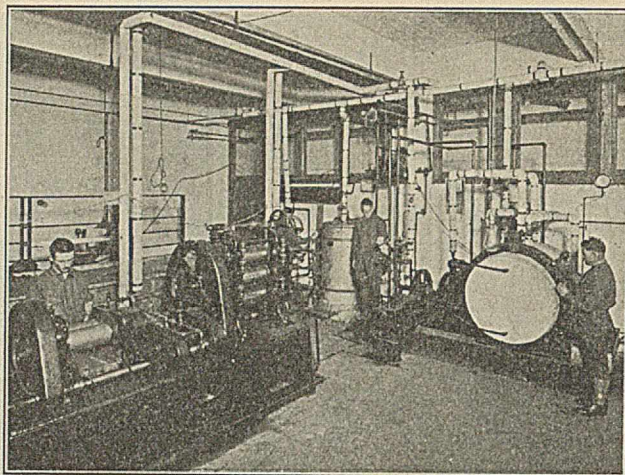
LONG ISLAND LABORATORY. EXPERIMENTAL RUBBER LABORATORY FOR MANUFACTURE OF RUBBER PARTS ON SMALL SCALE
